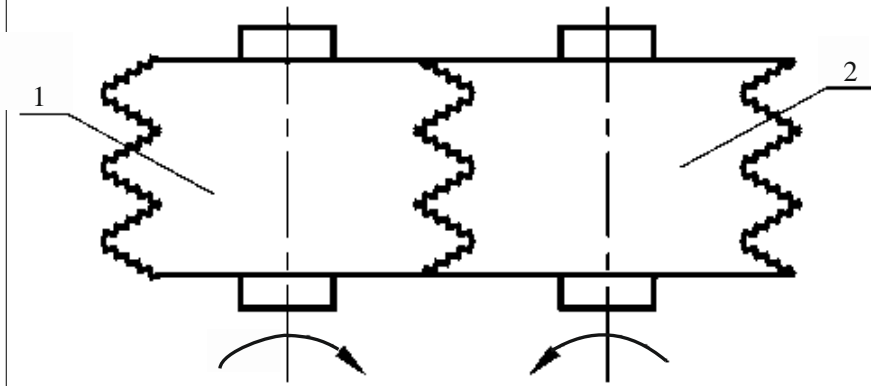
Zigzag profile rollers: 1,2 – rolls [23]
